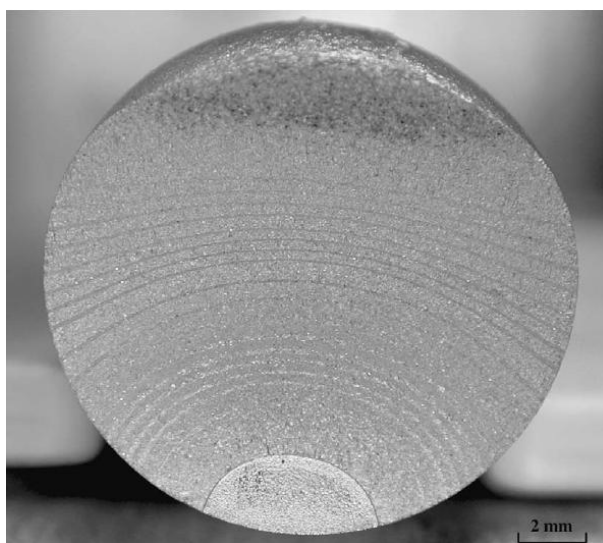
Fatigue fracture of a rod with beach marks. [20]
